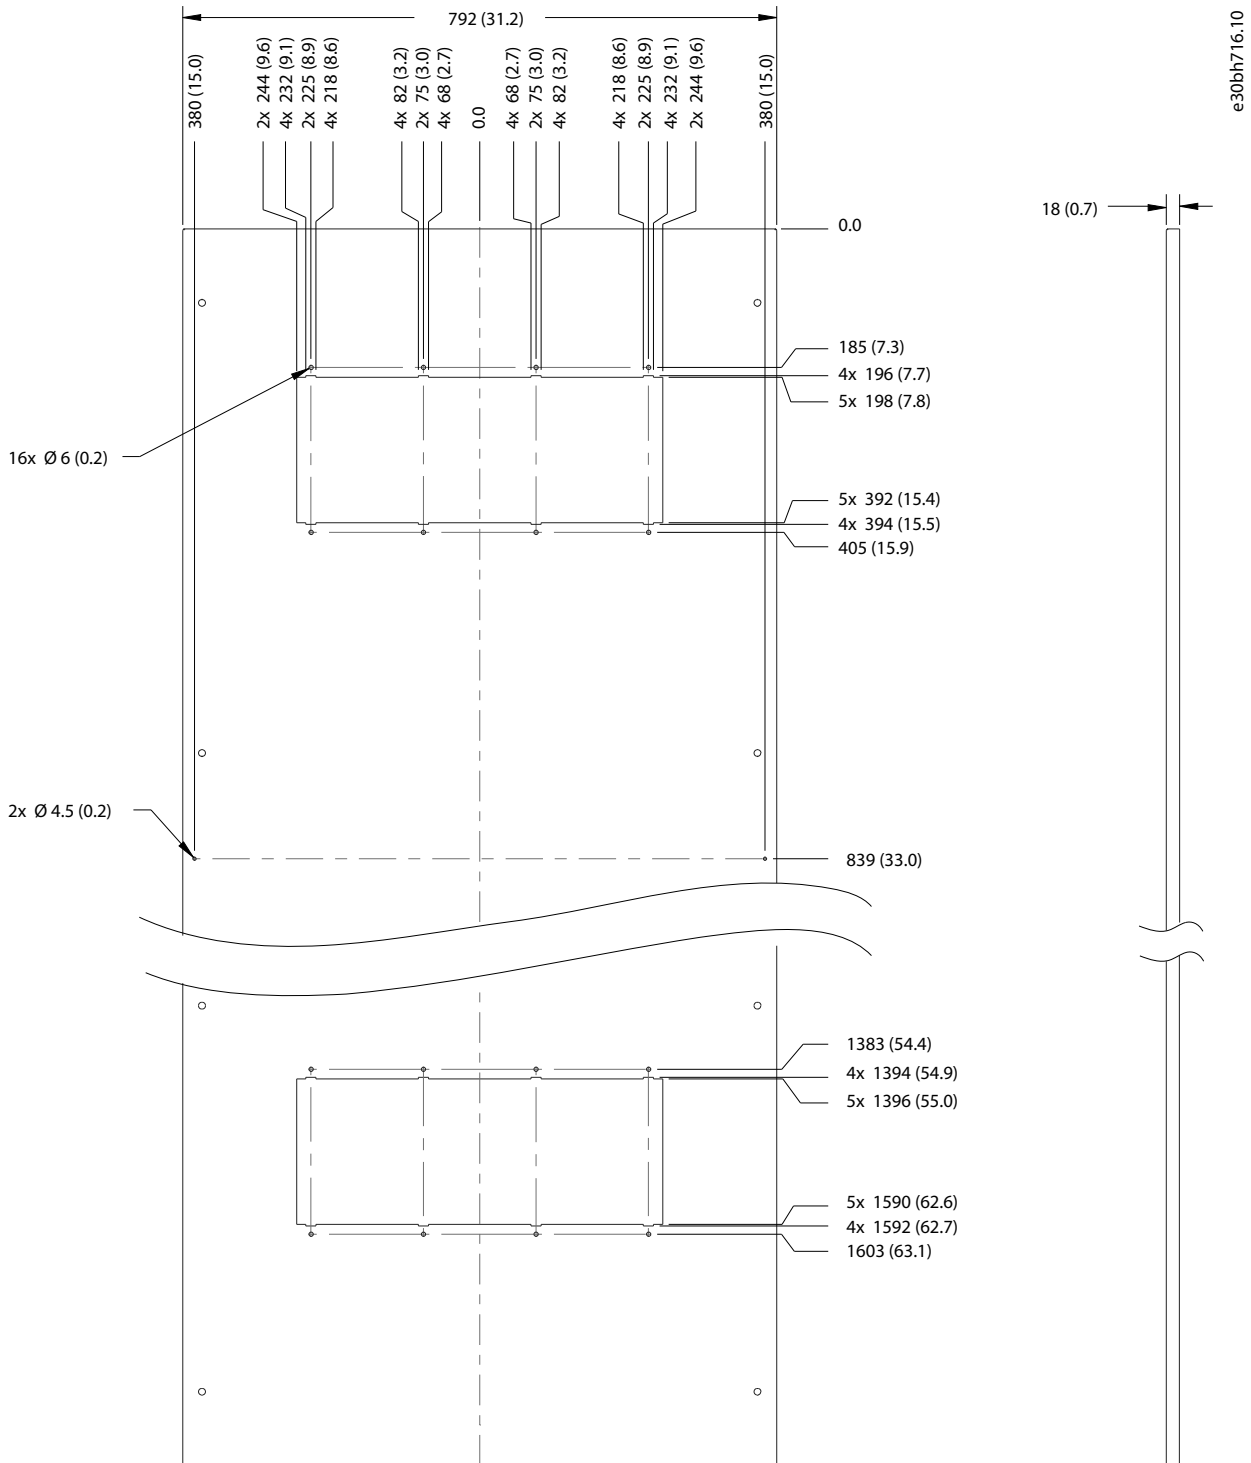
Vent Dimensions for Backplate in 800 mm (36 in) Enclosure
